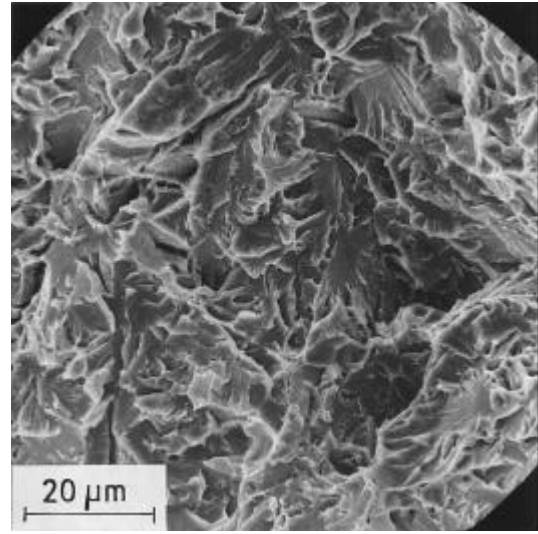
Cleavage fracture of a CVN specimen of steel 2 broken in lower shelf range
